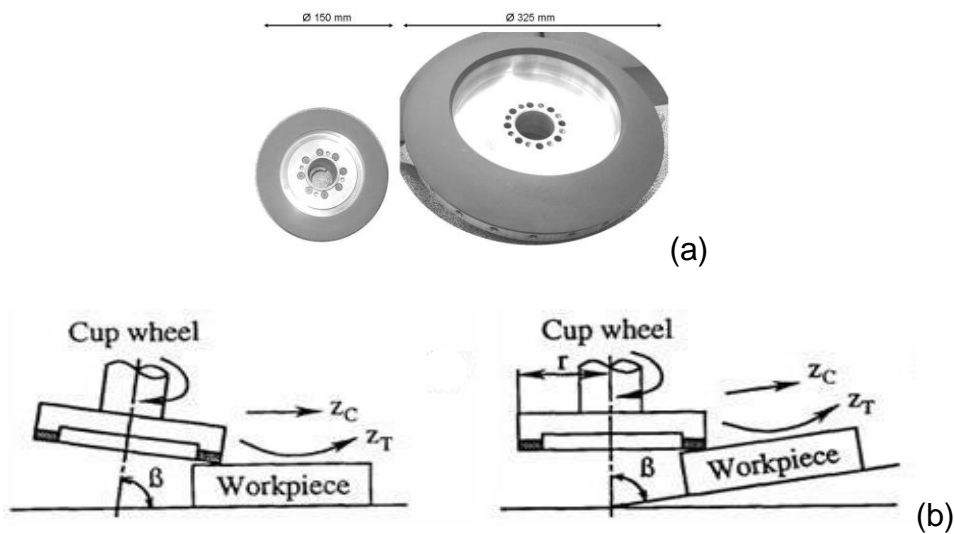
(a) resin bonded diamond grinding wheels; (b) two grinding modes (source: [77]).
